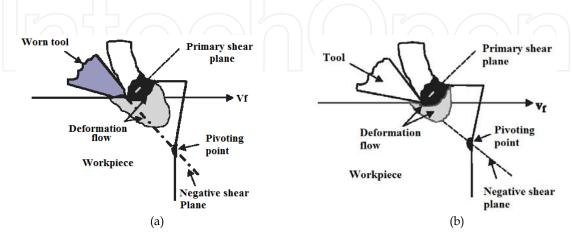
Shear angle and pivoting point for a (a) worn tool, (b) sharp tool (adapted from [54])
